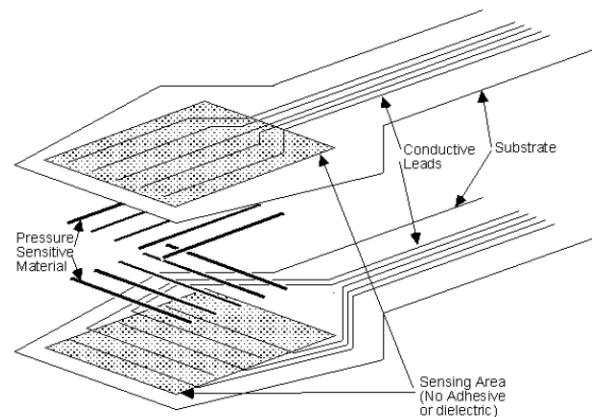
EXPLODED VIEW OF A TEKSCAN® SENSOR (4)
